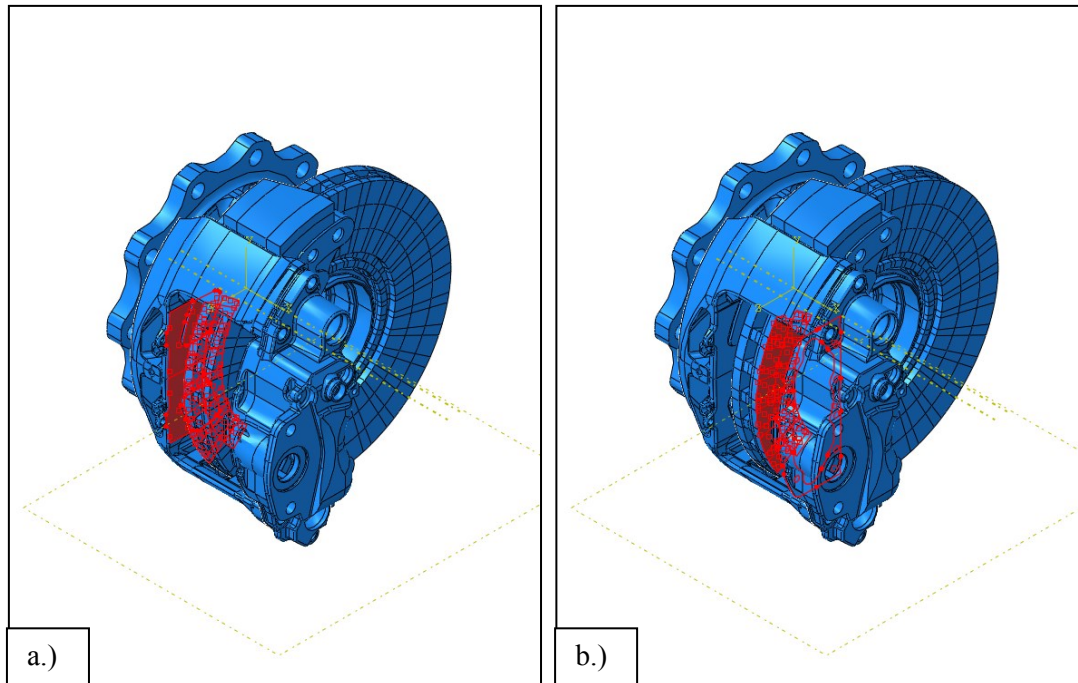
Radiation from disc brake friction surface a.) outboard to internal bridge surfaces, and b.) inboard to housing flange surface
